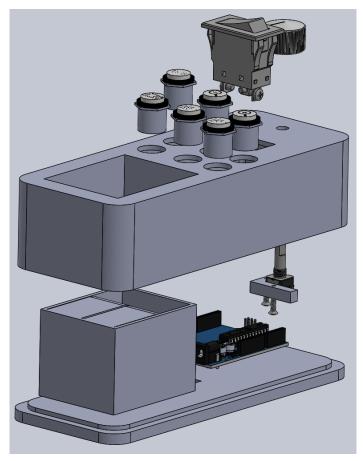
Exploded view of the final module with the placement of parts such as module body, lid, rocker switch, rotary knob/optical encoder, L-bracket, Arduino R3, window switches, and six buttons.
